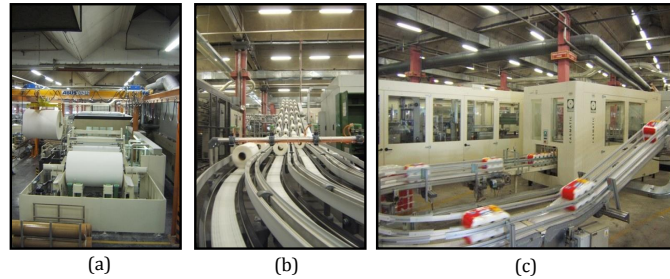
Example for a converting line: (a) Paper bobbins are loaded on converting machine, (b) they are cut into required sizes, (c) and at the end, they are packaged.
